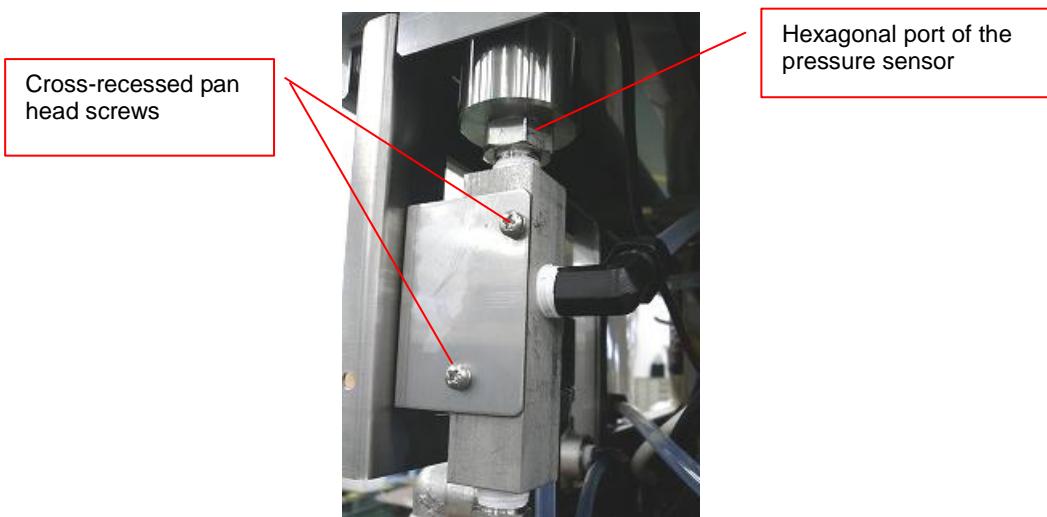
Removal of pressure sensor housing (2)
